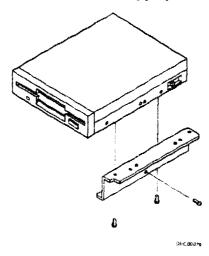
Attaching a 31/2-Inch Diskette Drive to the Mounting Adapter
